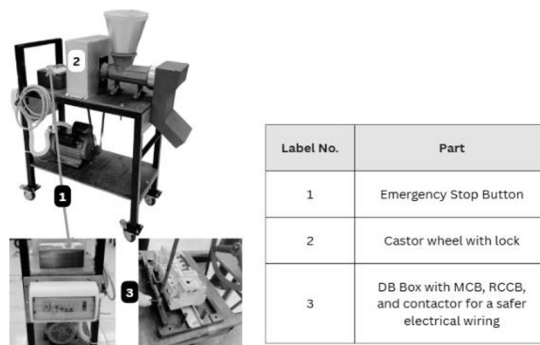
Safety focuses on the pellet machine. (Source: Authors)
